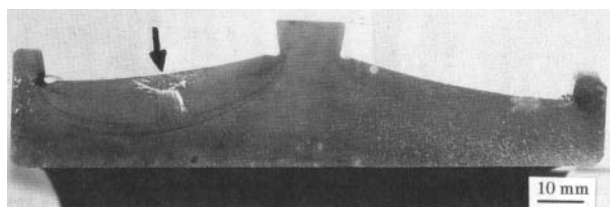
Fracture of a spherical roller bearing inner ring (Tsushima et al.¹³). The arrow shows the origin of the cracking
